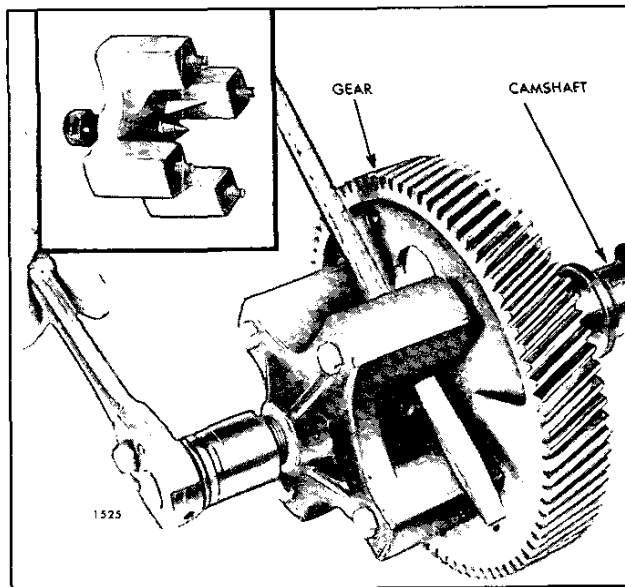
Removing Camshaft Gear with Tool J 1902-01
